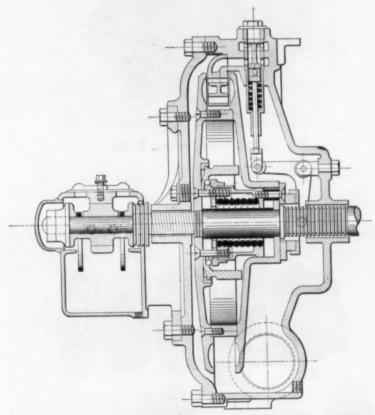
Section of Dake Headlight Turbine; Exterior Shown in Fig. 9
